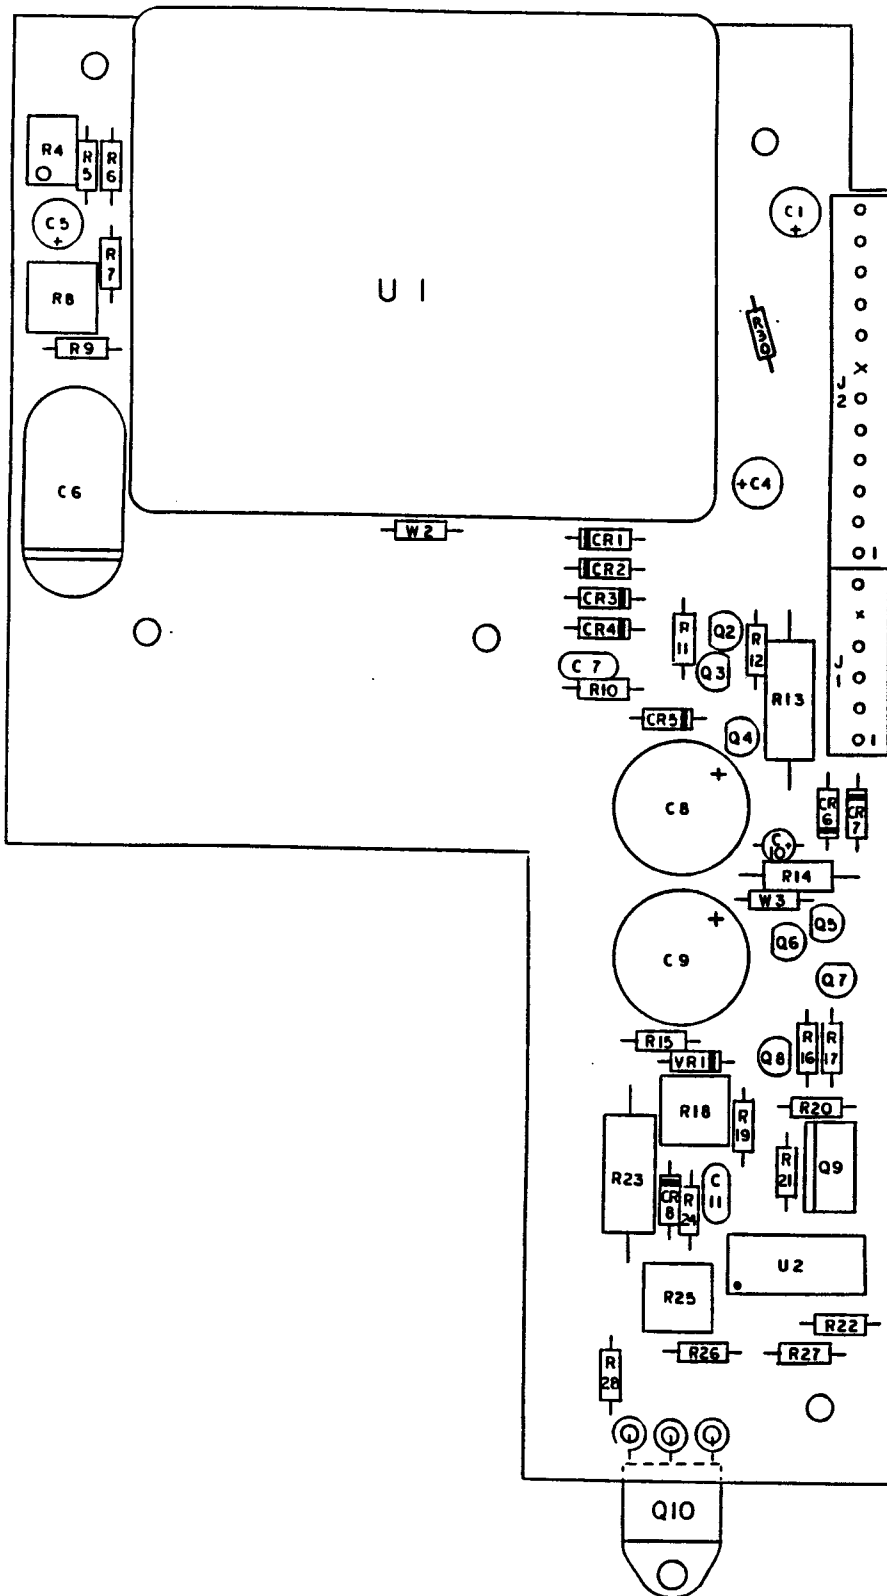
ASSEMBLY DRAWING - A5 OSCILLATOR AND POWER SUPPLY
